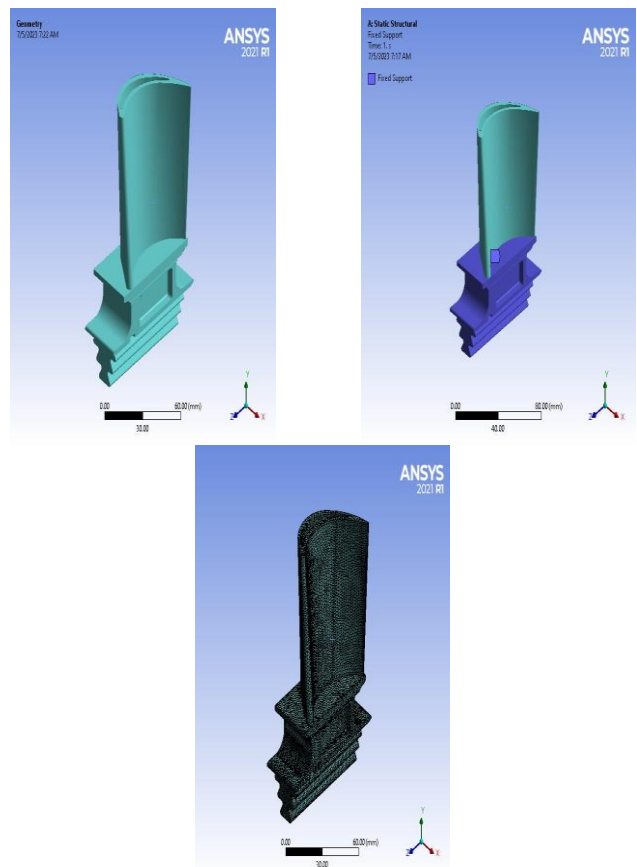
Geometry of Blade, Fixed Support and the mesh technique of gas turbine rotor
